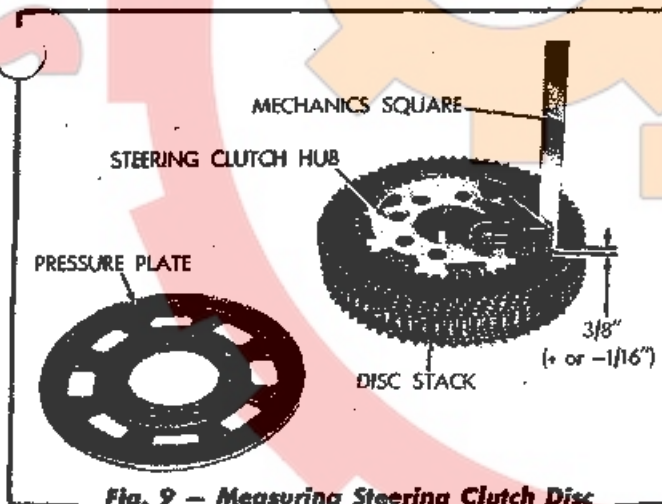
Measuring Steering Clutch Disc Stack Height
